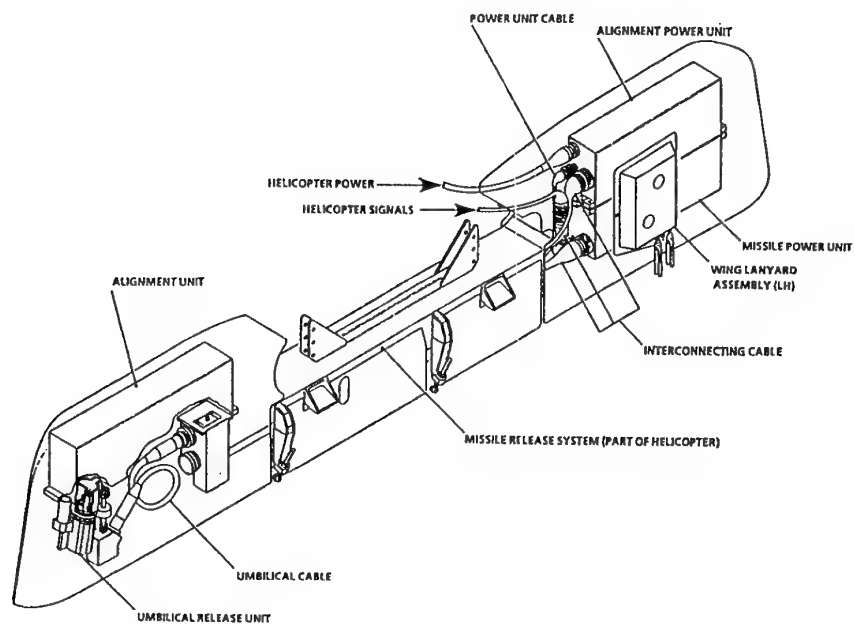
Cut-through drawing of the Missile Launch Adapter (MLA)
